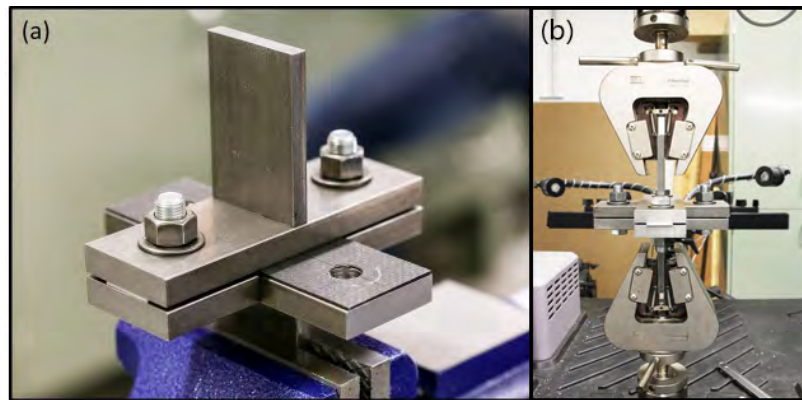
(a) Fixture for cross-tension tests; (b) cross tensile testing setup consisting of an MTS load frame and the fixture.
